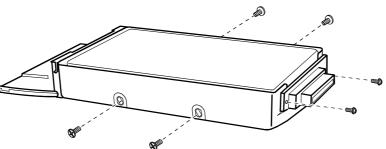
REMOVING THE HARD DISK DRIVE BRACKET
